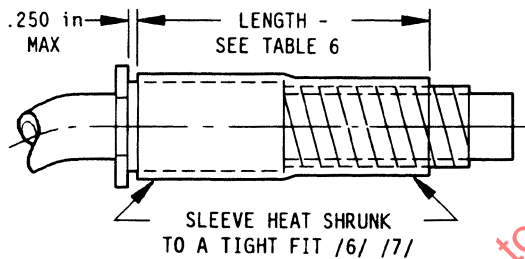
ABRASION SLEEVE ATTACHMENT
